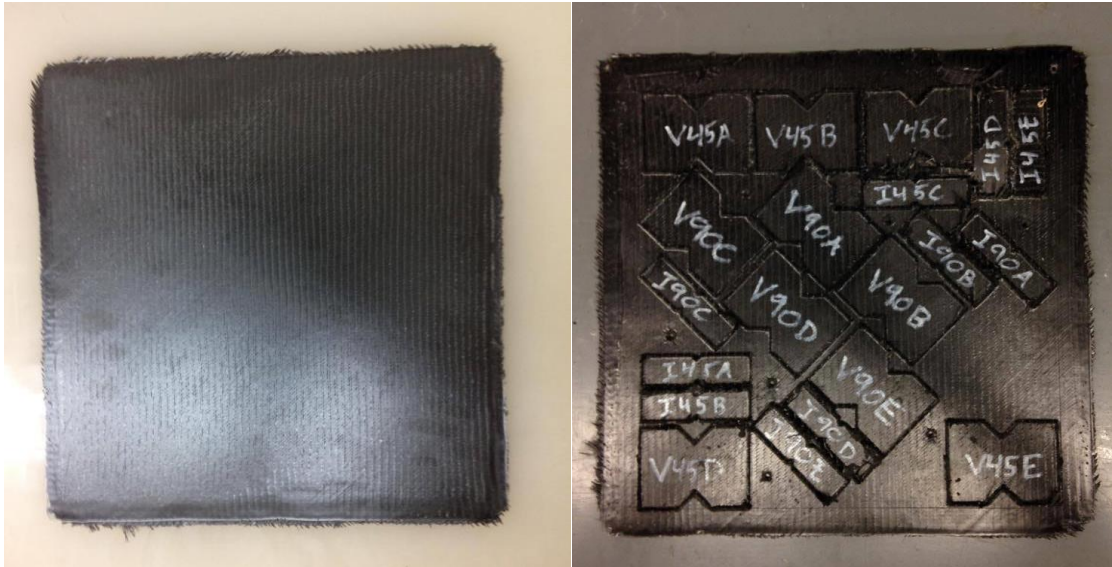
Composite Plate before and after machining, showing specimen layout
